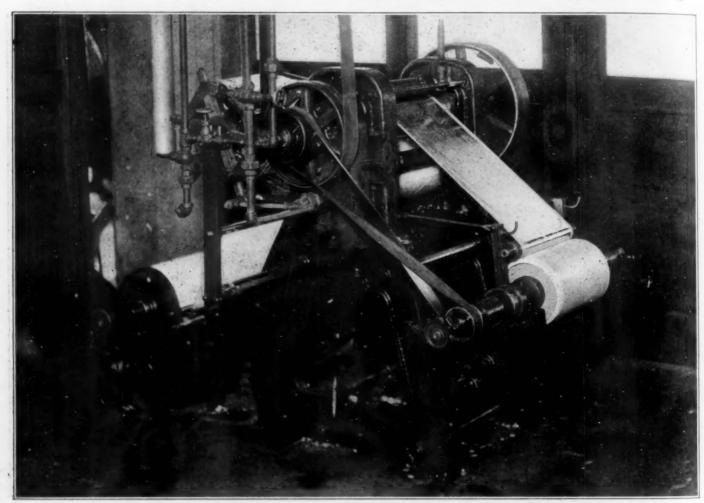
THIS MACHINE IS USED FOR PUTTING DESIGNS ON FOIL OR PAPER. IT CONSISTS OF STEEL ENGRAVED ROLL
